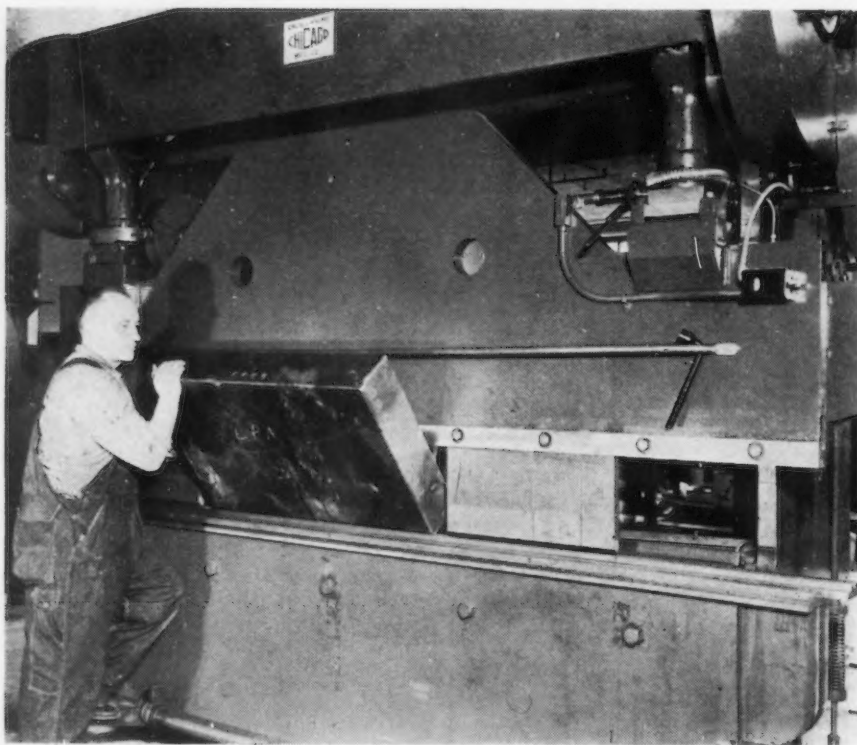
Boxes are finally formed by braking them in a V-bending die. This view shows the use of sectional male dies in the final closing operation.
